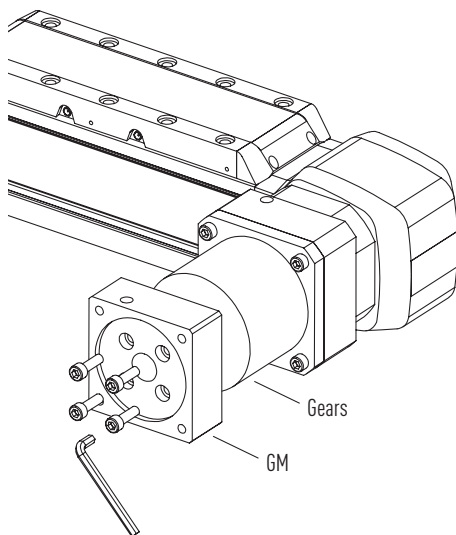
Mounting the motor gear adapter plate GM (HM-B)
